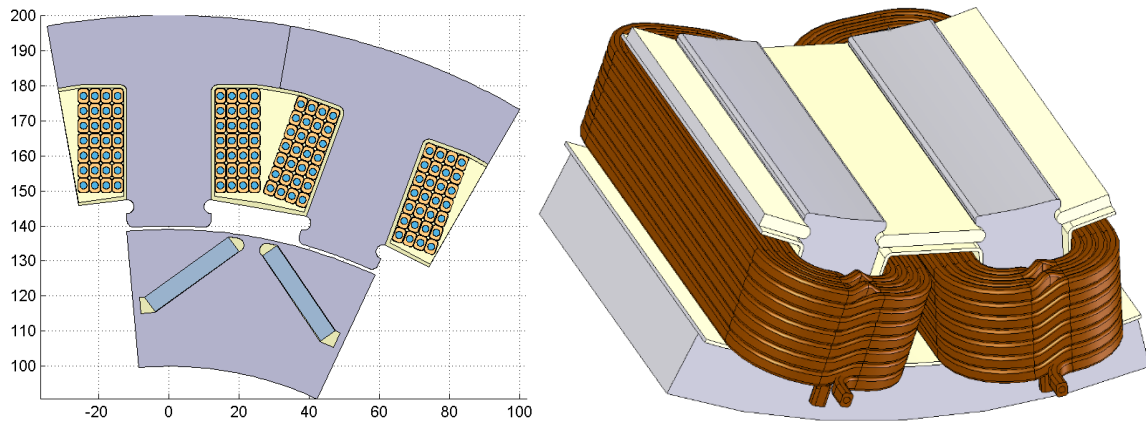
A fraction of stator assembly consisting of two coils: 2D cross-section including rotor(left) and 3D image
